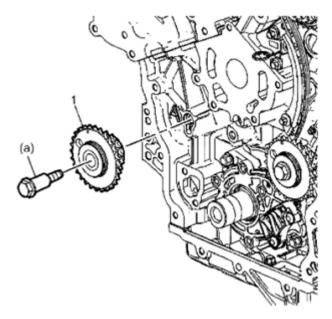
Identifying Crankshaft Timing Sprocket And Key Courtesy of SUZUKI OF AMERICA CORP.
